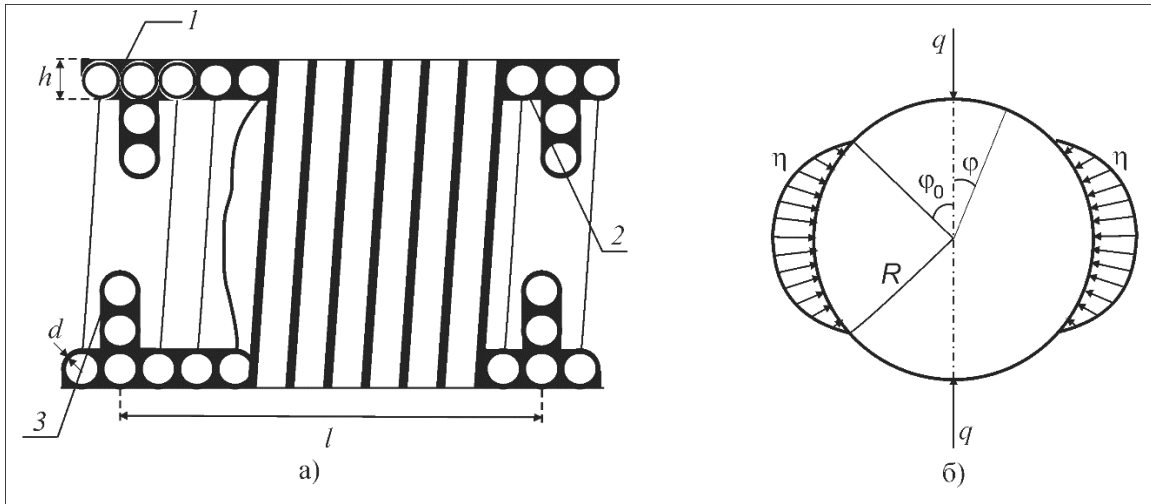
Cellular spiral single-layer pipe. 1 – welded seam; 2 – tube winding of the pipe wall; 3 – elastic ring supports
